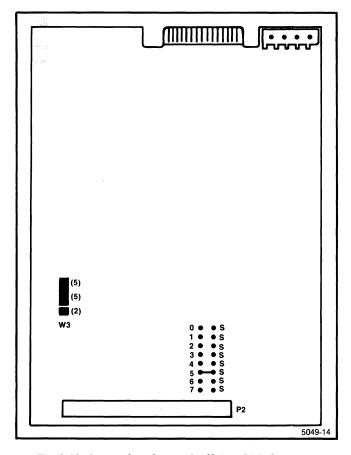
Jumper location on the Xebec Disk Controller.
